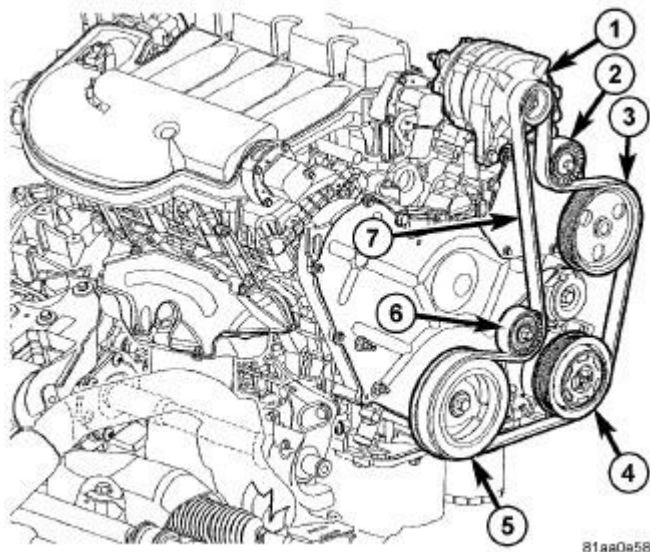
Identifying Accessory Drive Belt & Pulleys
